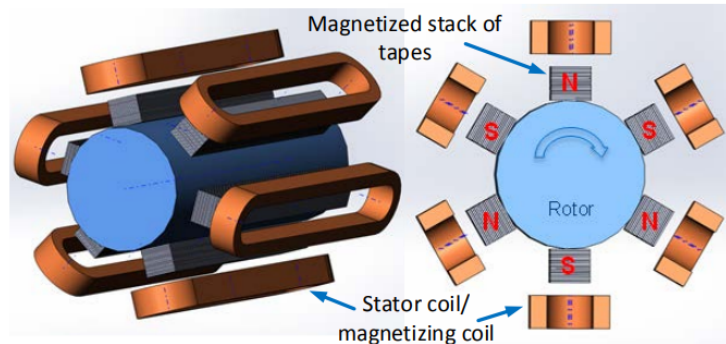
HTS motor with conventional stator windings and HTS stacks embedded in the rotor [9].
